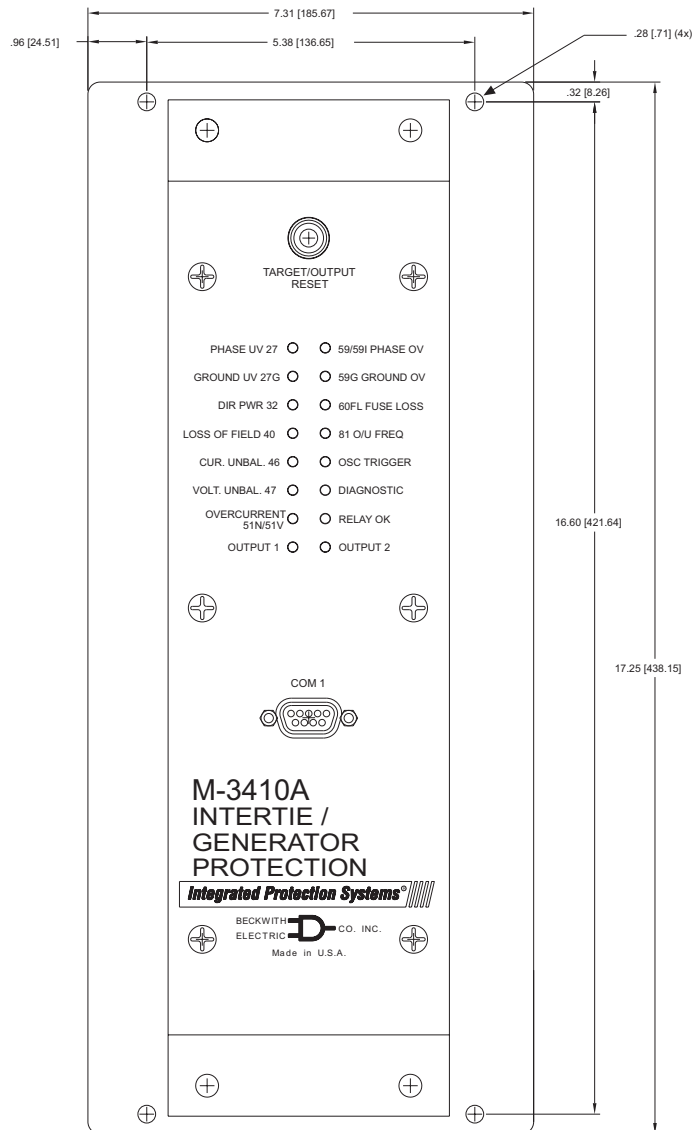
M-0290 and M-0296 Replacement Adapter Plate Dimensions
